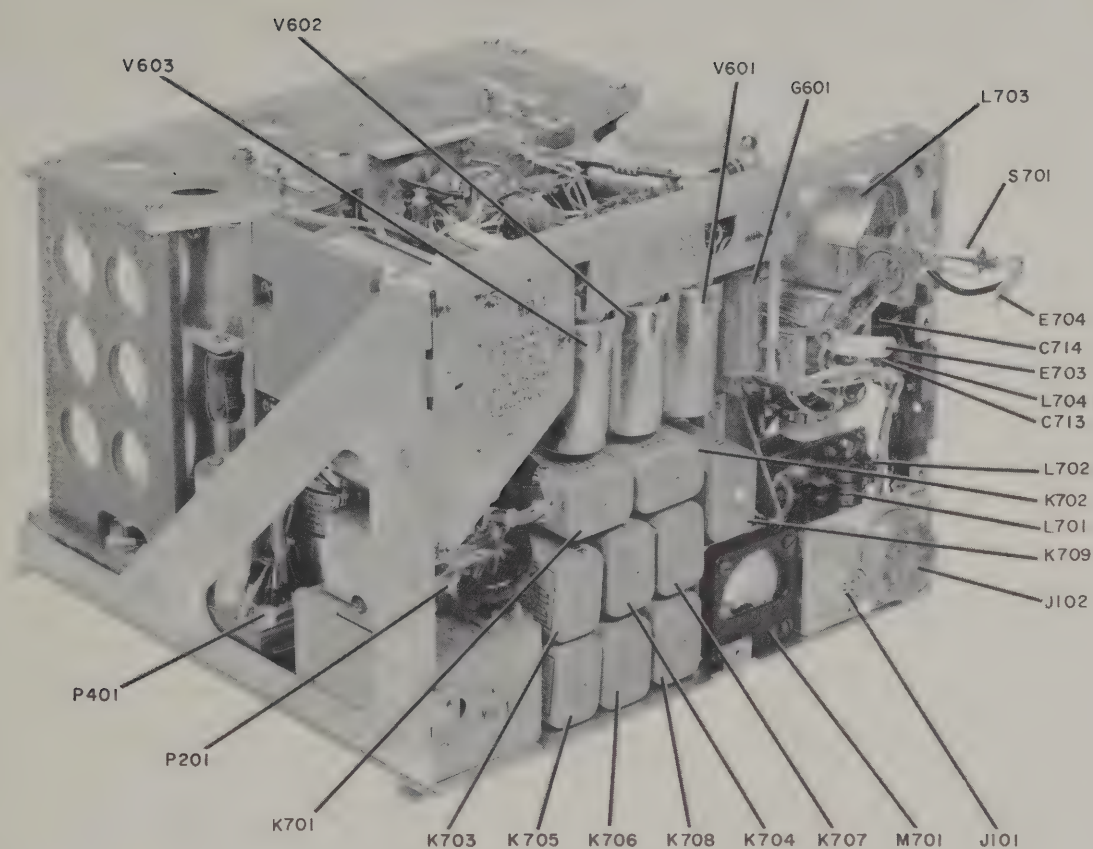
Automatic Antenna Tuner 180L-3, Front View, Covers Removed
